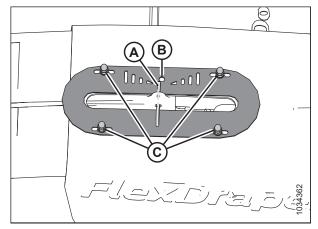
Wing Movement Indicator on Top of Flex Linkage Cover – Left Side Shown
